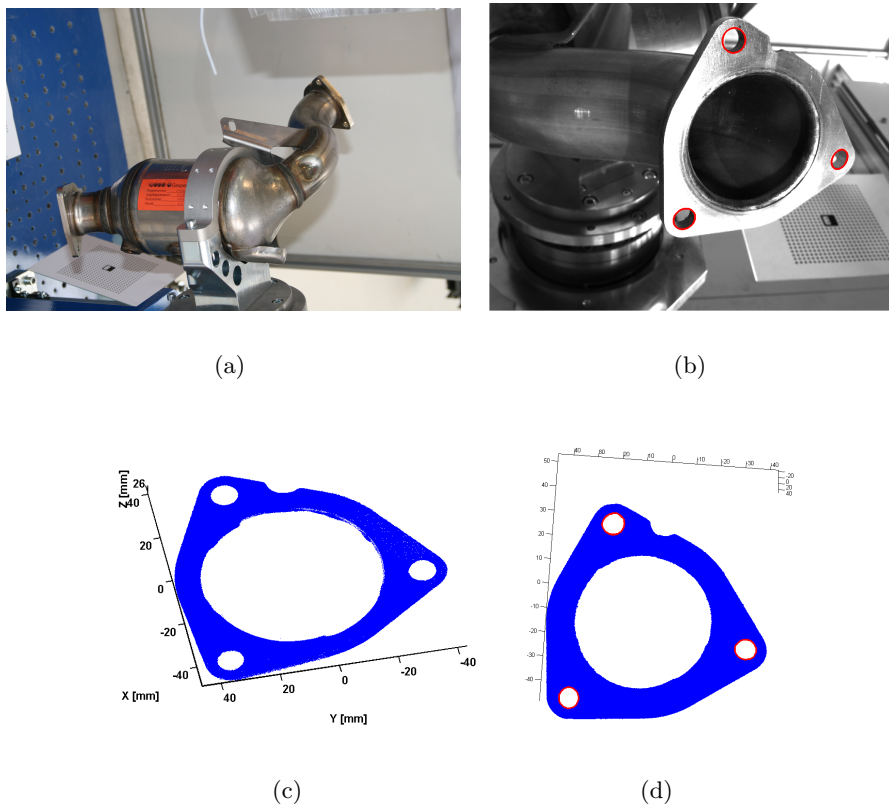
Exemplary measurement application. An exhaust pipe (a) has to be inspected for dimensional correctness of entrance flange (left) and exit flange (right). A measurement image of one flange with marked boreholes is shown in (b). The point-cloud resulting from a structured light reconstruction is shown in (c). Measured borehole circles on the point-cloud is shown in (d).
